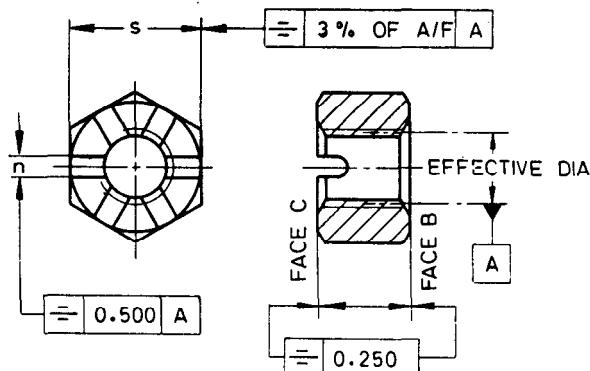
GEOMETRICAL TOLERANCES FOR BOLTS
